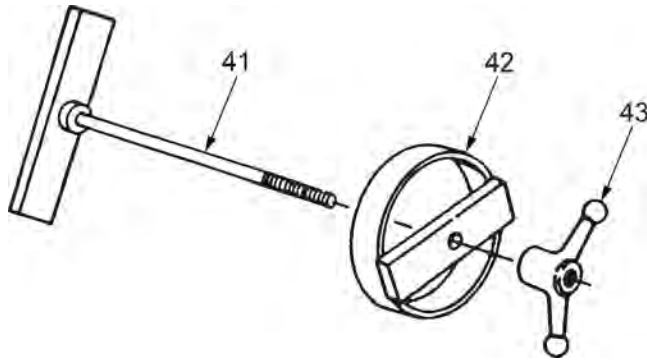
Bar and Stud Assembly for Retaining Ring Installation.
